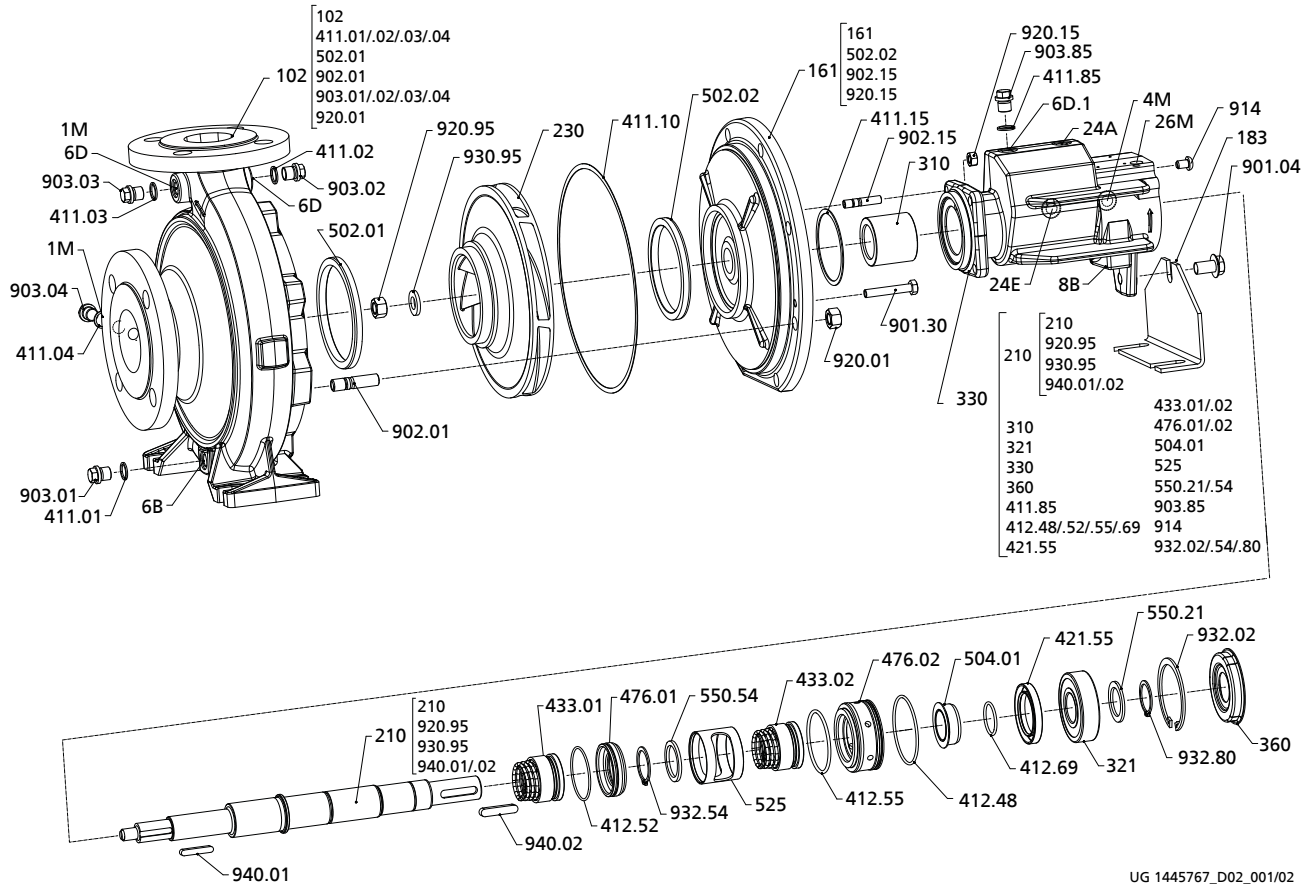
Exploded view of an Etanorm SYT; bearing bracket WS\_25\_LS with double mechanical seal
